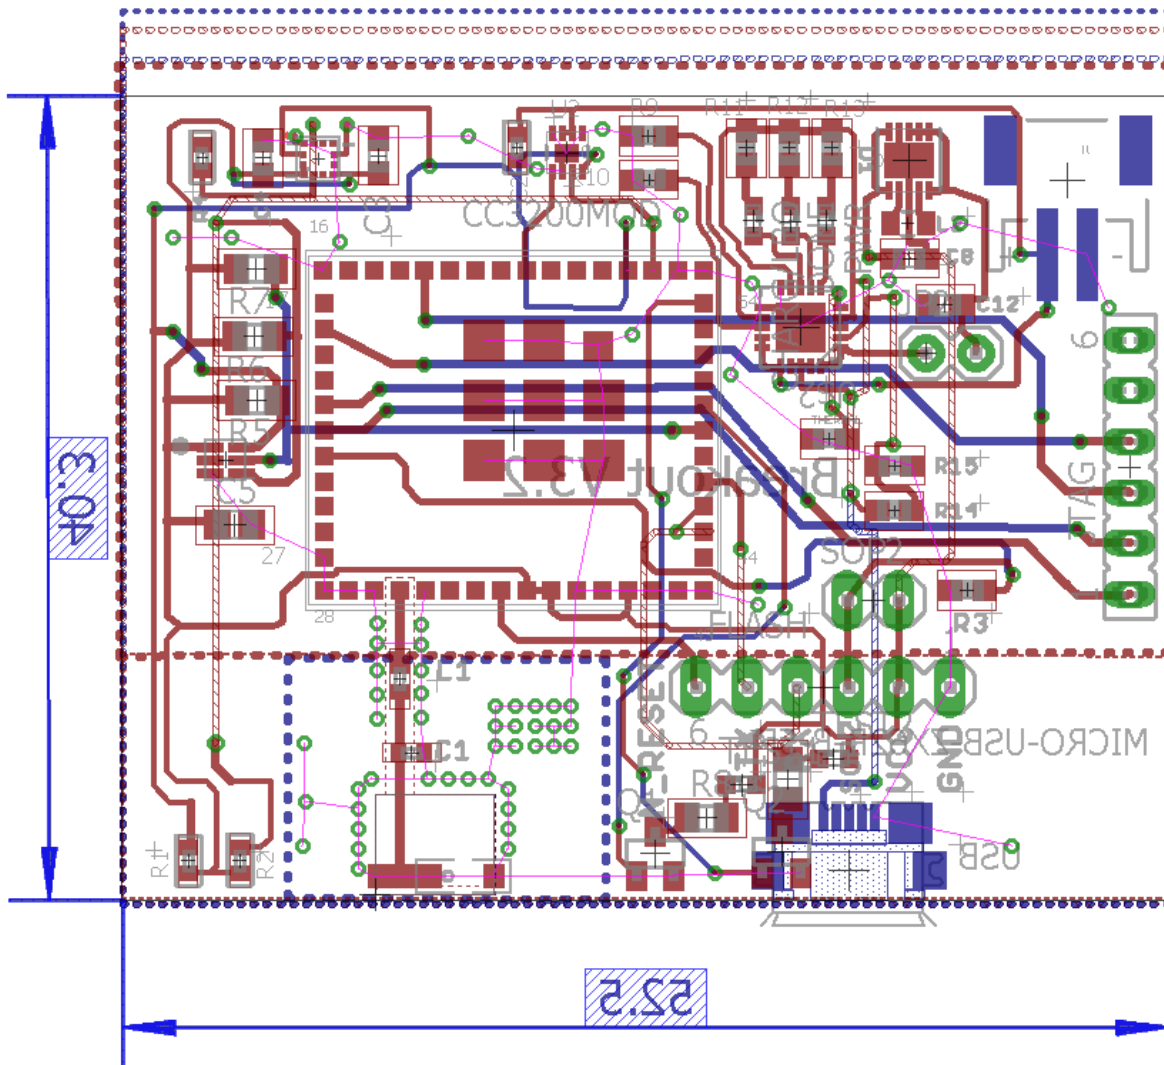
OVERALL SYSTEM PCB BOARD ON EAGLE CAD
